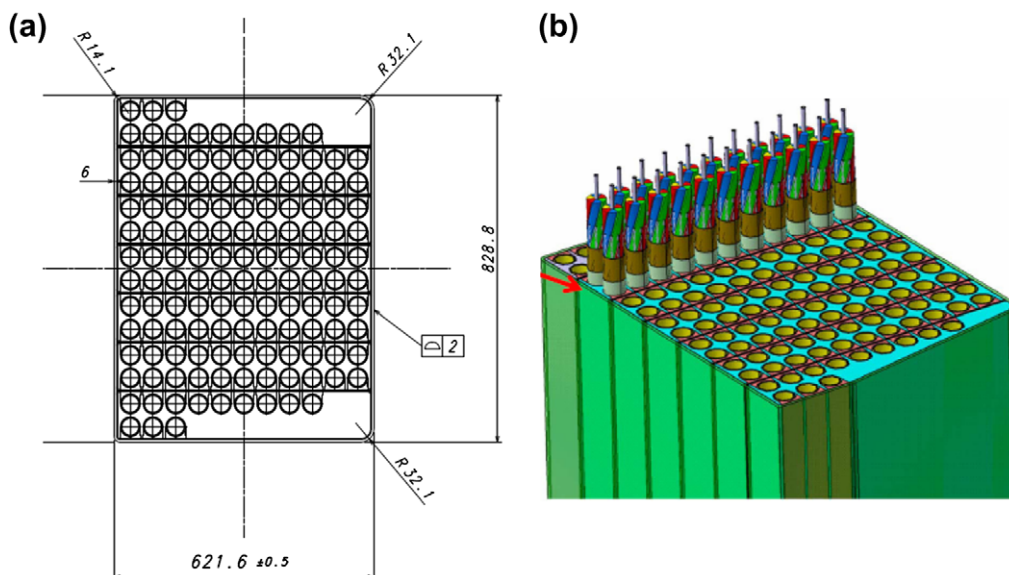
(a) Outboard leg cross section of the ITER TF winding pack along on the equatorial plane of the machine (reproduced from ITER technical documentation). (b) Sketch of the inboard ITER TF winding pack (reproduced from [1]).
